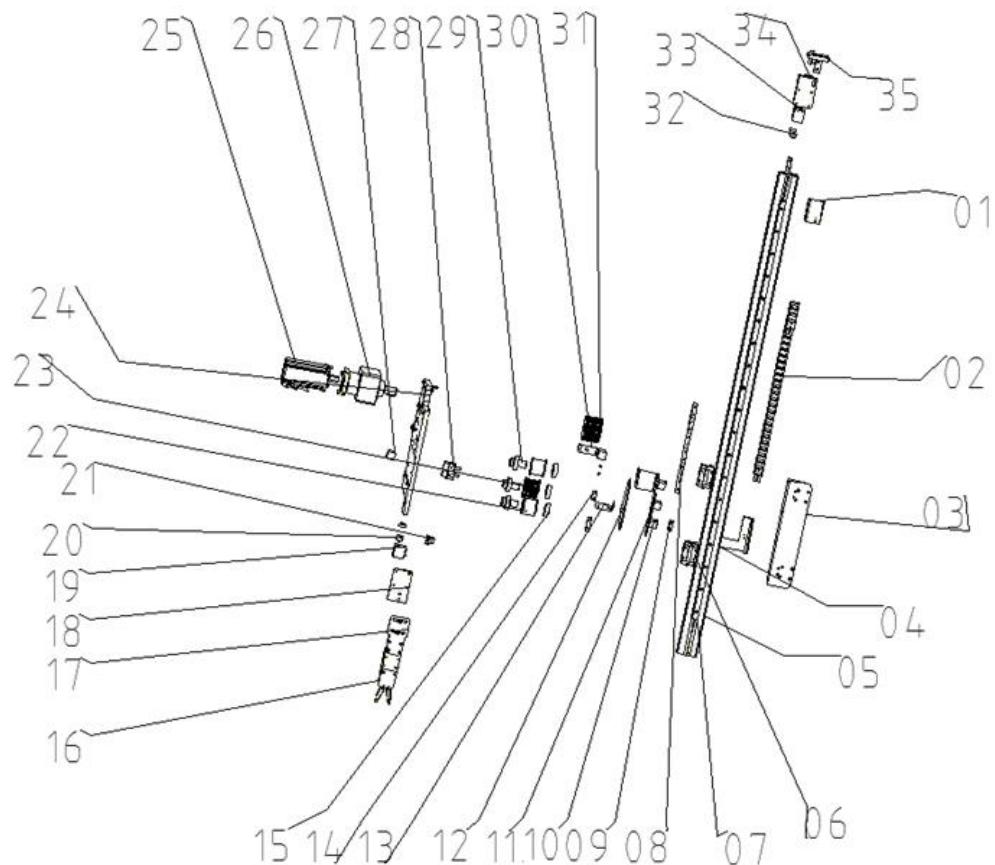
ST5 Sub-arm unit (single-stage arm) exploded view
